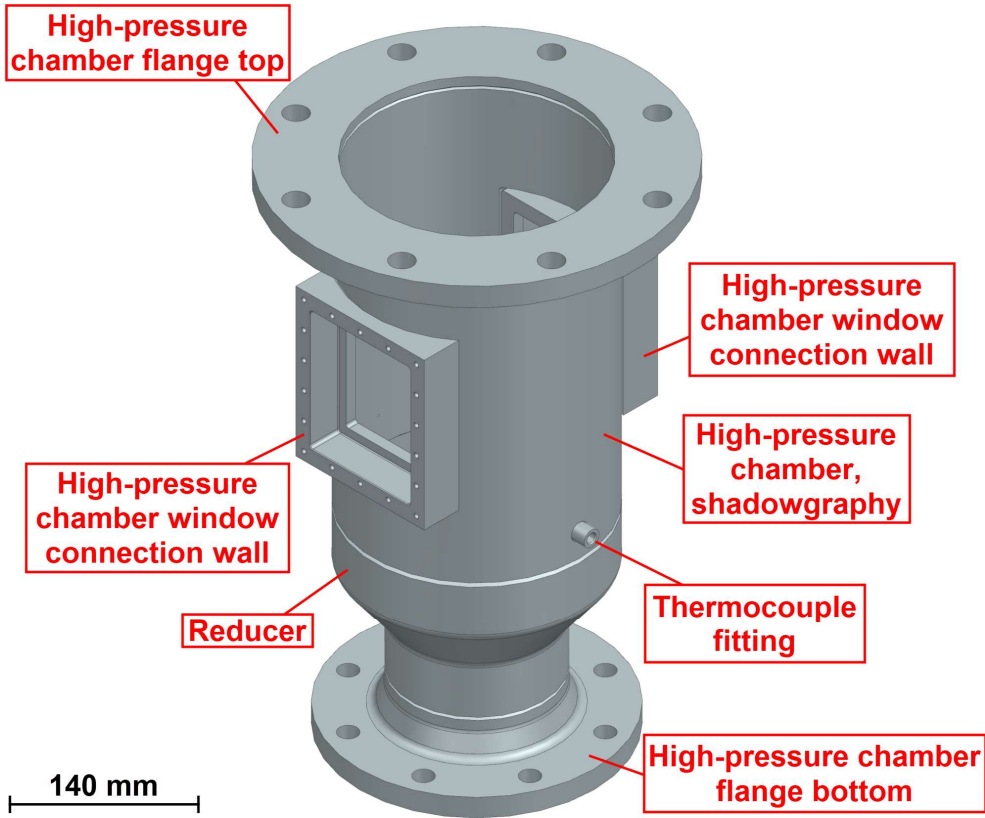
High-pressure chamber assembly, shadowgraphy (isometric view).
